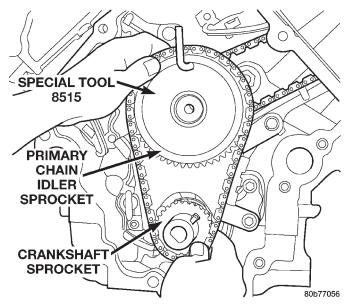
Installing Idler Gear, Primary and Secondary Timing Chains
